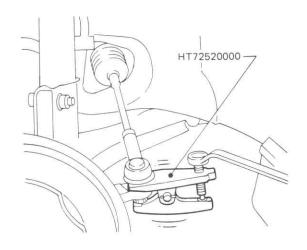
Removing the steering rod to steering knuckle balljoint (Sec 3)
